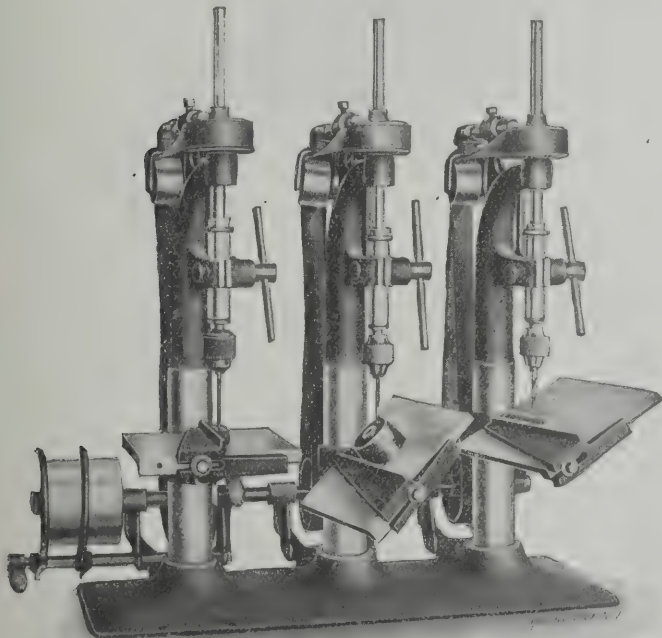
Rockford Three-spindle Bench Drill, showing Use of Tilting Table and Adjustable Gage
